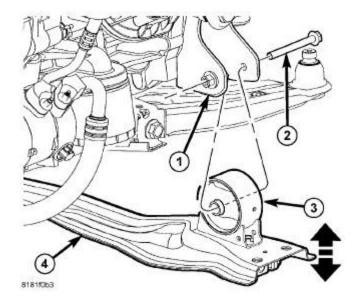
Front Engine Mount Through Bolt Courtesy of CHRYSLER LLC
